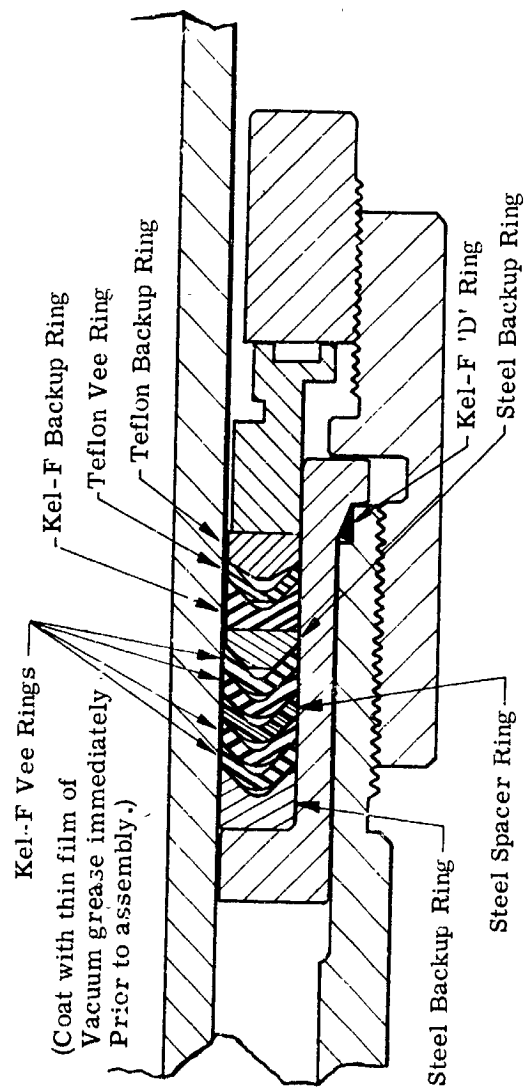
Dynamic Vacuum Seal Assembly - Final Configuration for Low Temperature Testing
